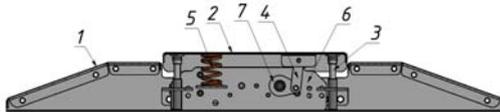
General view of the EP, where: 1 – housing(body), 2 - pressure cover, 3 - guides, 4 - crank drive; 5 - springs, 6 - multiplier; 7 - the drive wheel of the crank mechanism)
